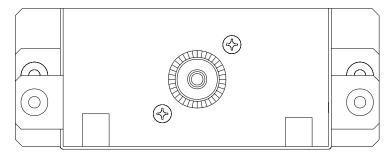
Rear view of UHF housing without interlock (back plate removed)
